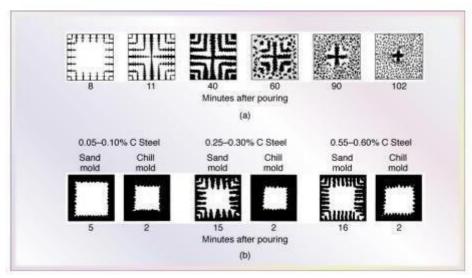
(a) Solidification patterns for grey cast iron in a 180mm square casting. Note that after 11 minutes of cooling, dendrites reach each other, but the casting is still mushy throughout. It takes about two hours for this casting to solidify completely. (b)Solidification of carbon steels in sand and chill (metal) molds. Note the difference in solidification patterns as the carbon content increases.
